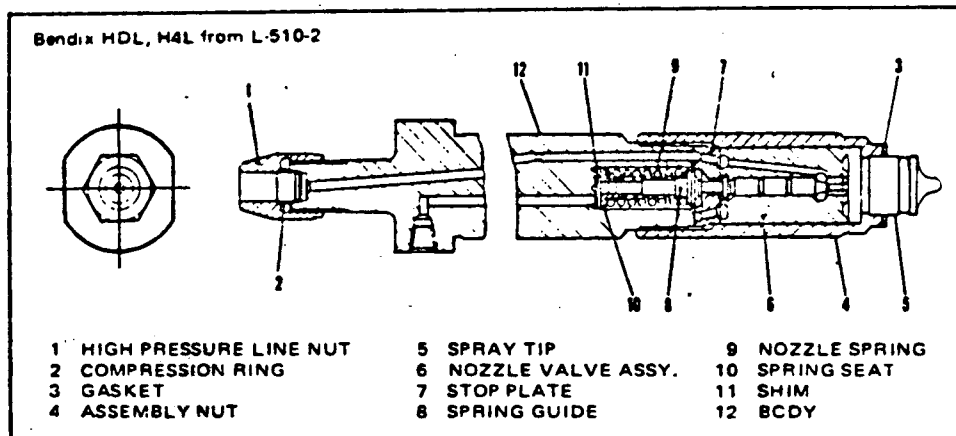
F-1. Sectional View of Typical Nozzle and Holder Assembly
